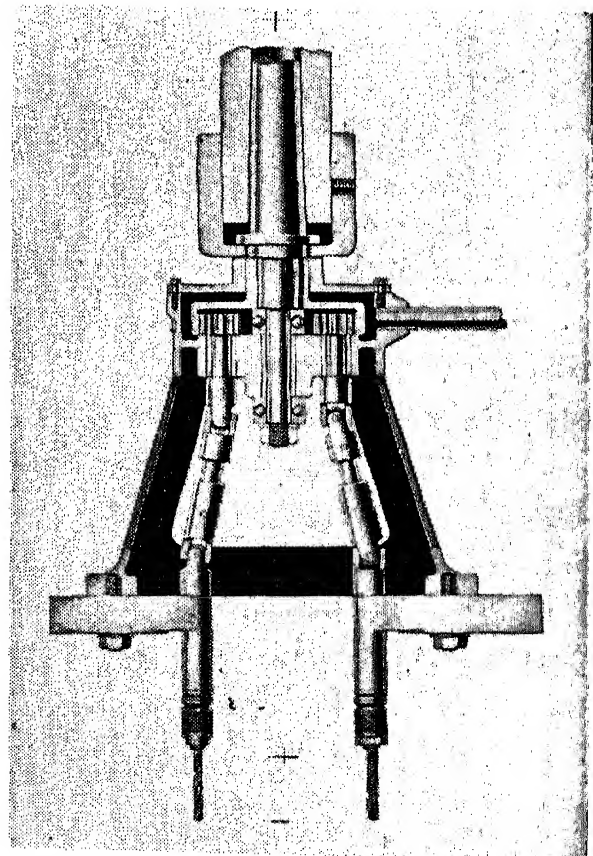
A cross-section of a portable and adjustable multiple spindle drill head. (Courtesy Baush Machine Tool Co.)
